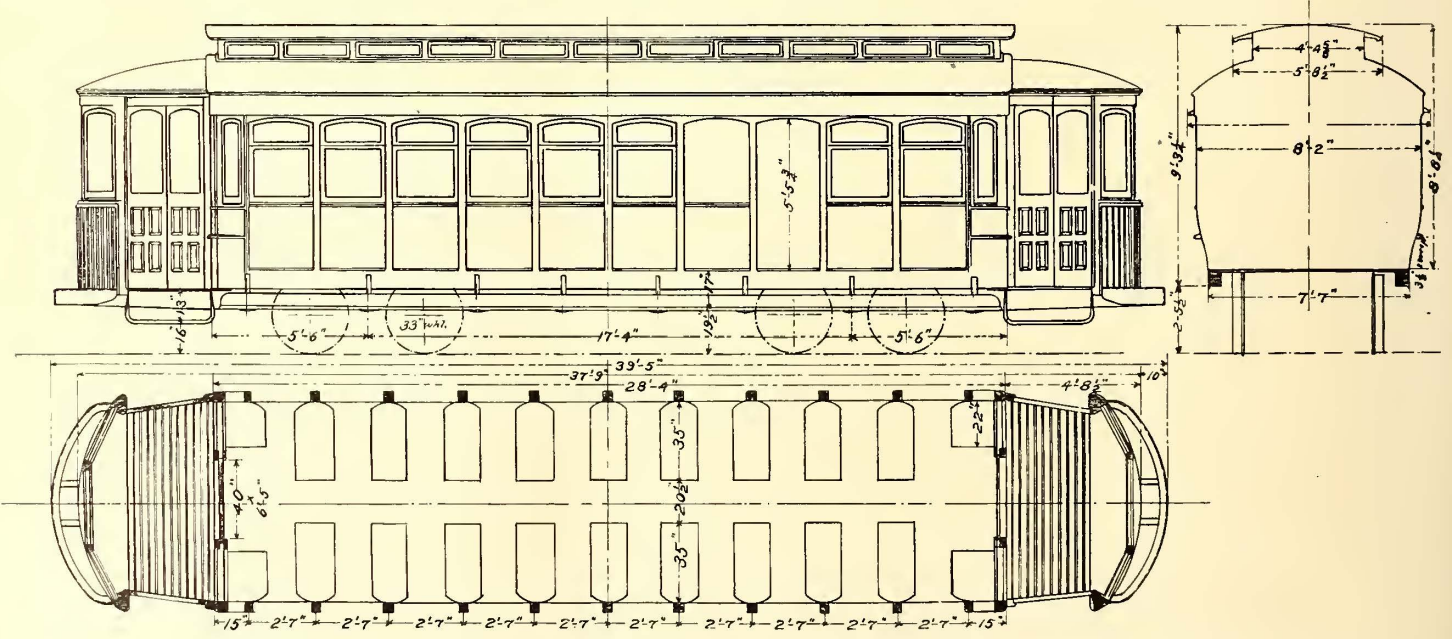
PLAN, SIDE ELEVATION AND END ELEVATION OF STANDARD DOUBLE-TRUCK CONVERTIBLE CAR
